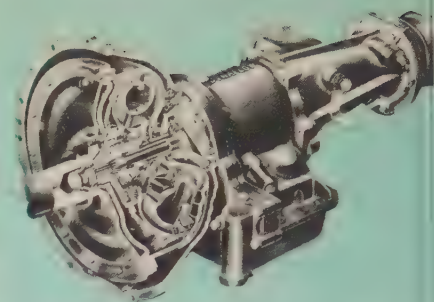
Cutaway view of the assembled Buell Dynaflow torque converter.
